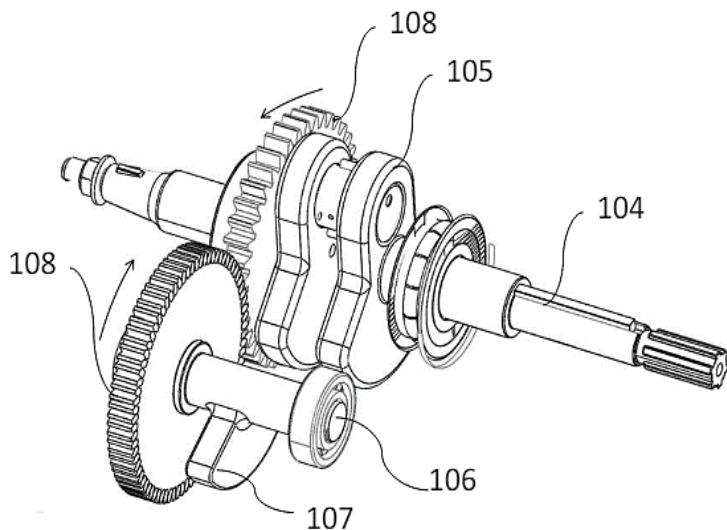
Perspective view of a crankshaft and an auxiliary shaft. Referral numeral (refer Page 2)
